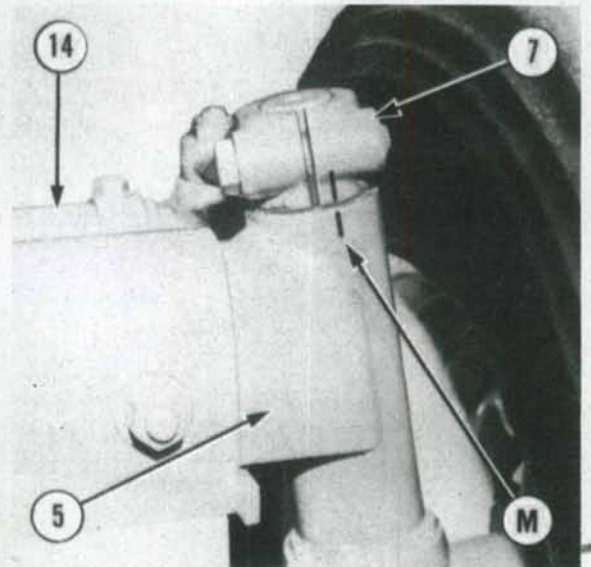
Marks (M) are provided on the axle extensions and the steering arms to assist in setting toe-in.
